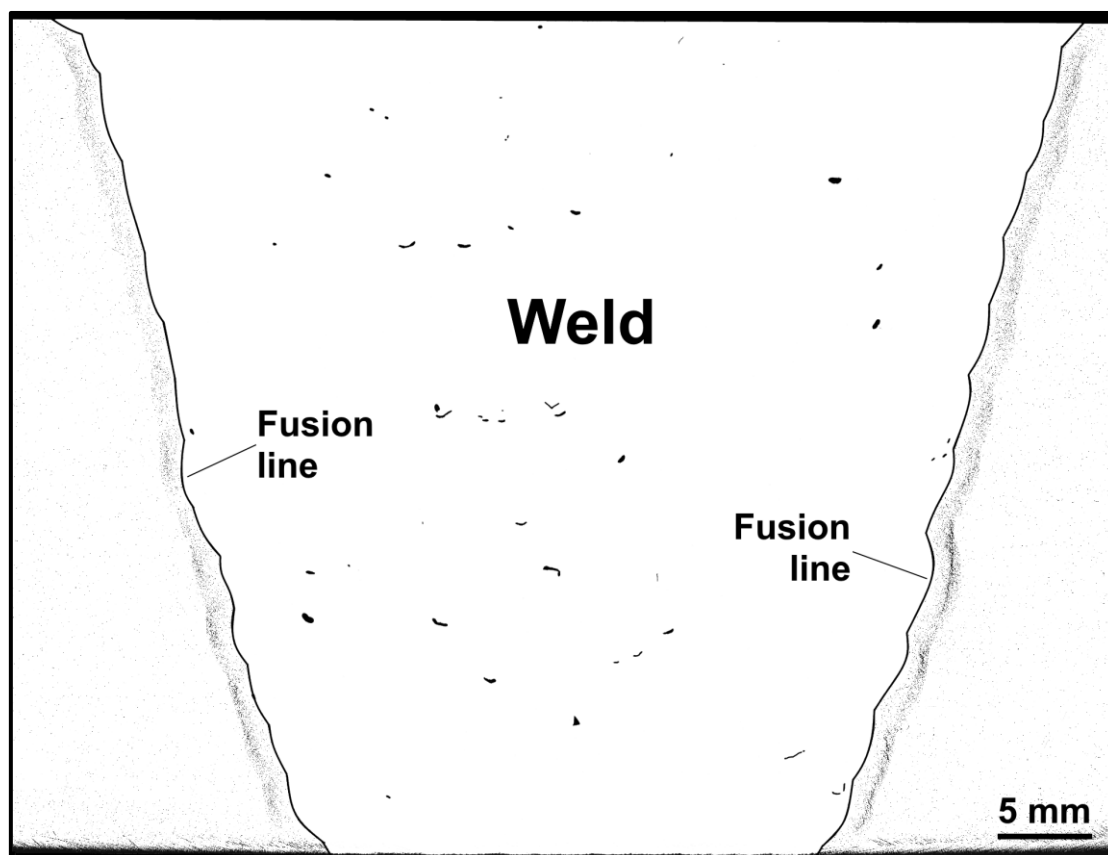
Macro-image of damage in feature-type cross-weld test sample 9C-3
